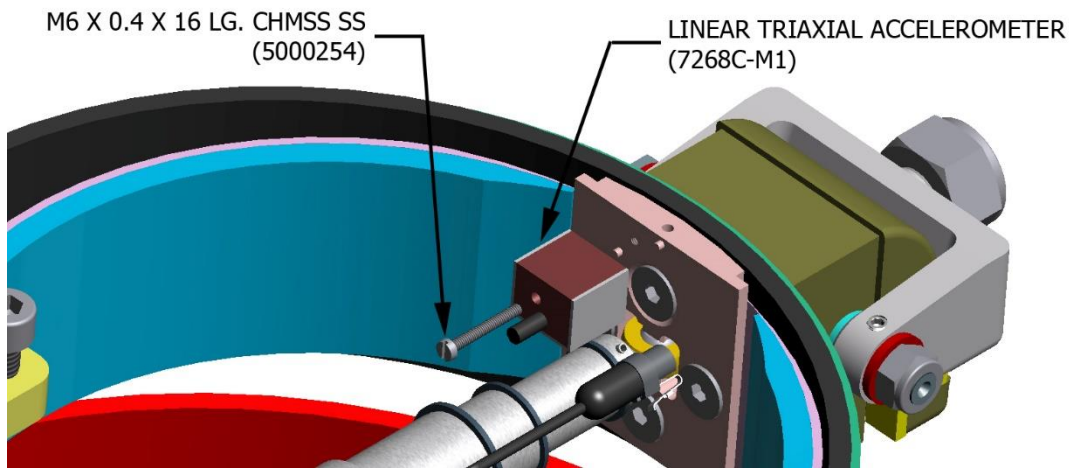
Removing linear triaxial accelerometer from shoulder rib mounting bracket.
